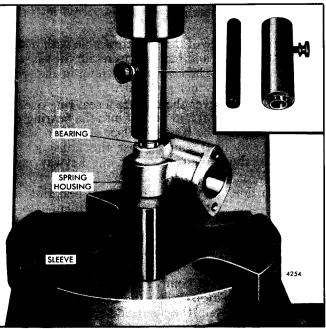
Installing Speed Control Shaft Bearings in Spring Housing using Tool J 9196
